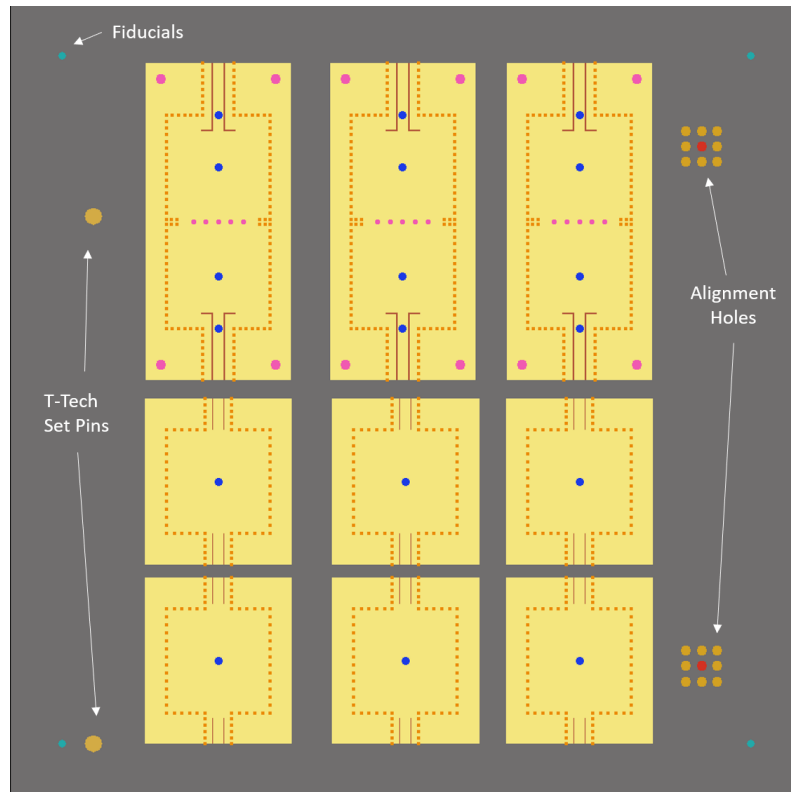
Example of board layout with an array of resonators and fully reconfigurable filter designs with labels pointing to the fiducial vias, set pin holes, and alignment holes
